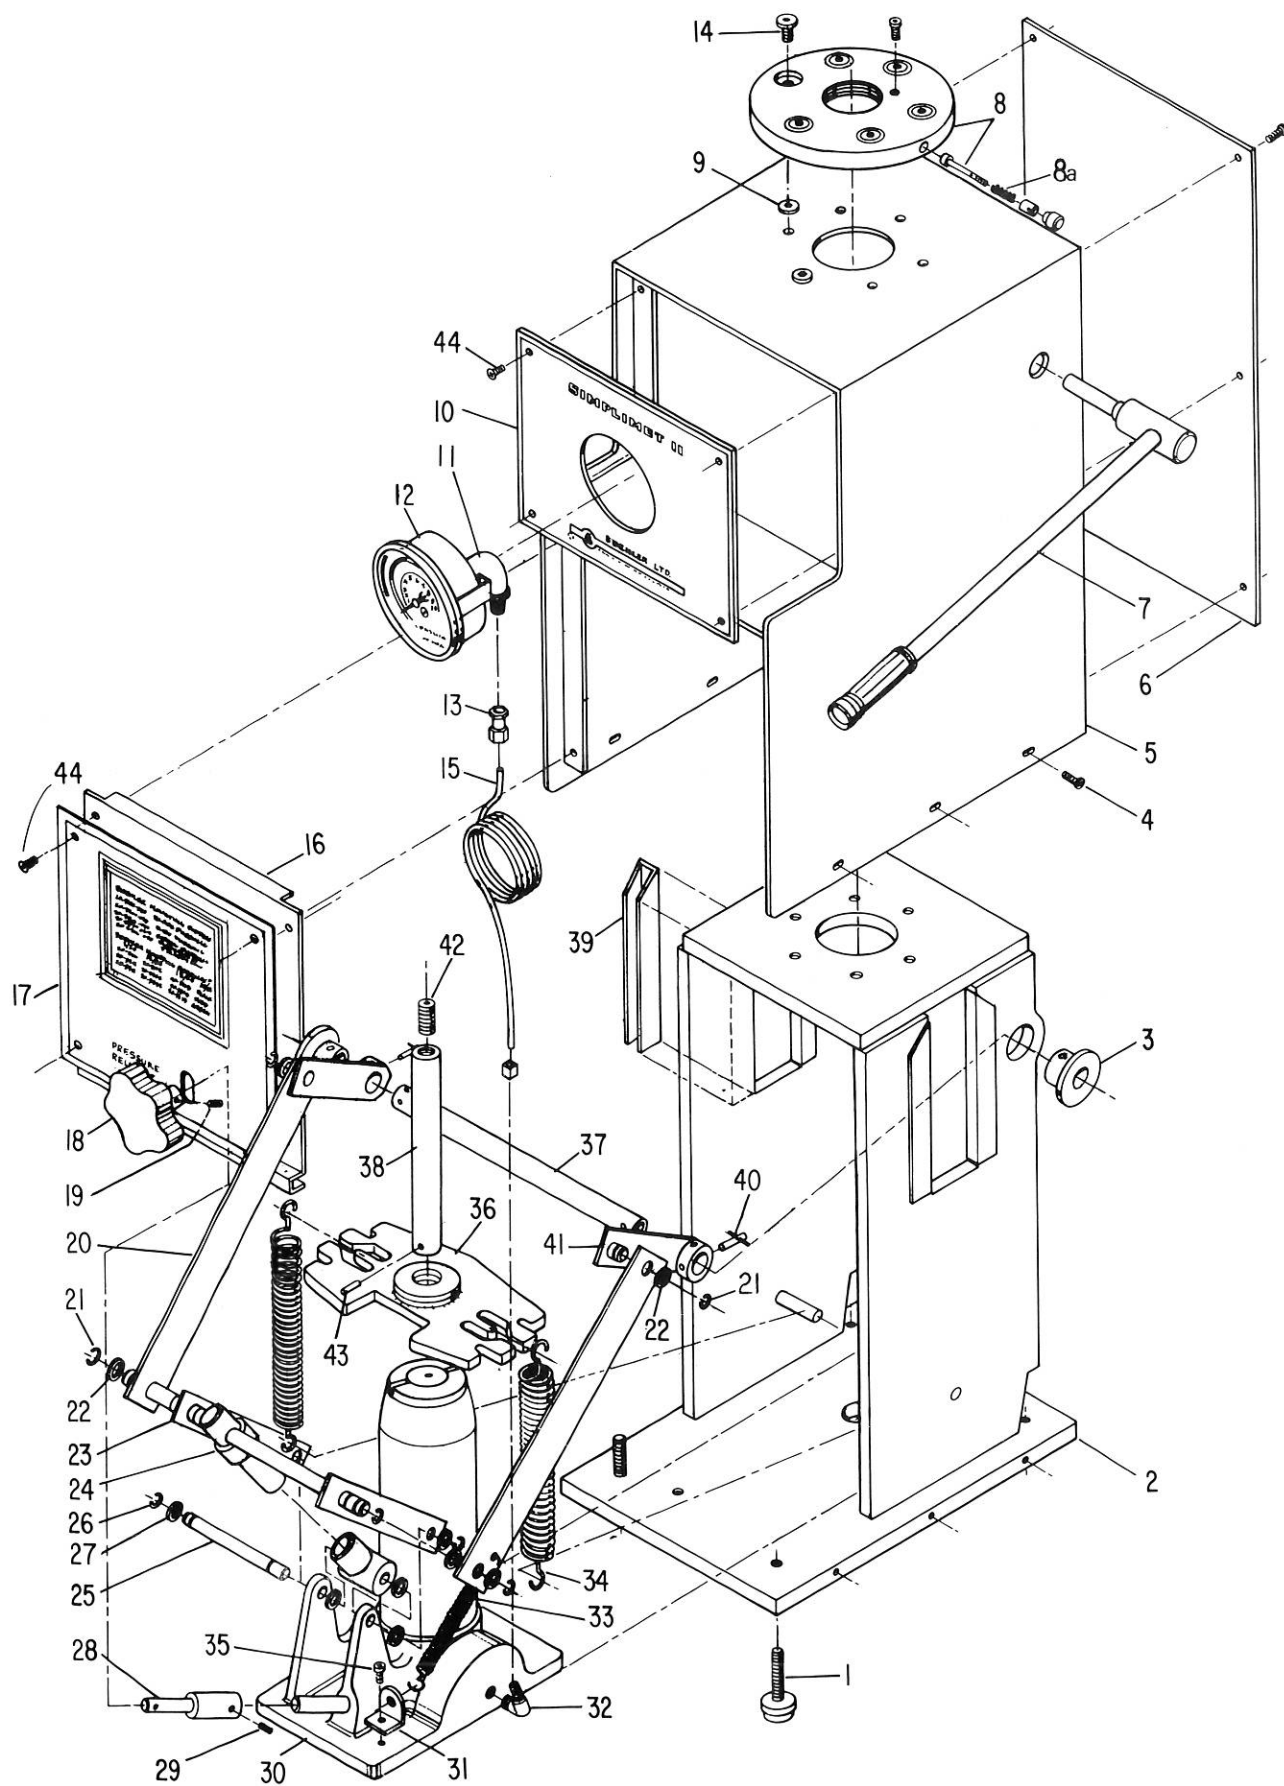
SIMPLIMET® II ASSEMBLY DETAIL
